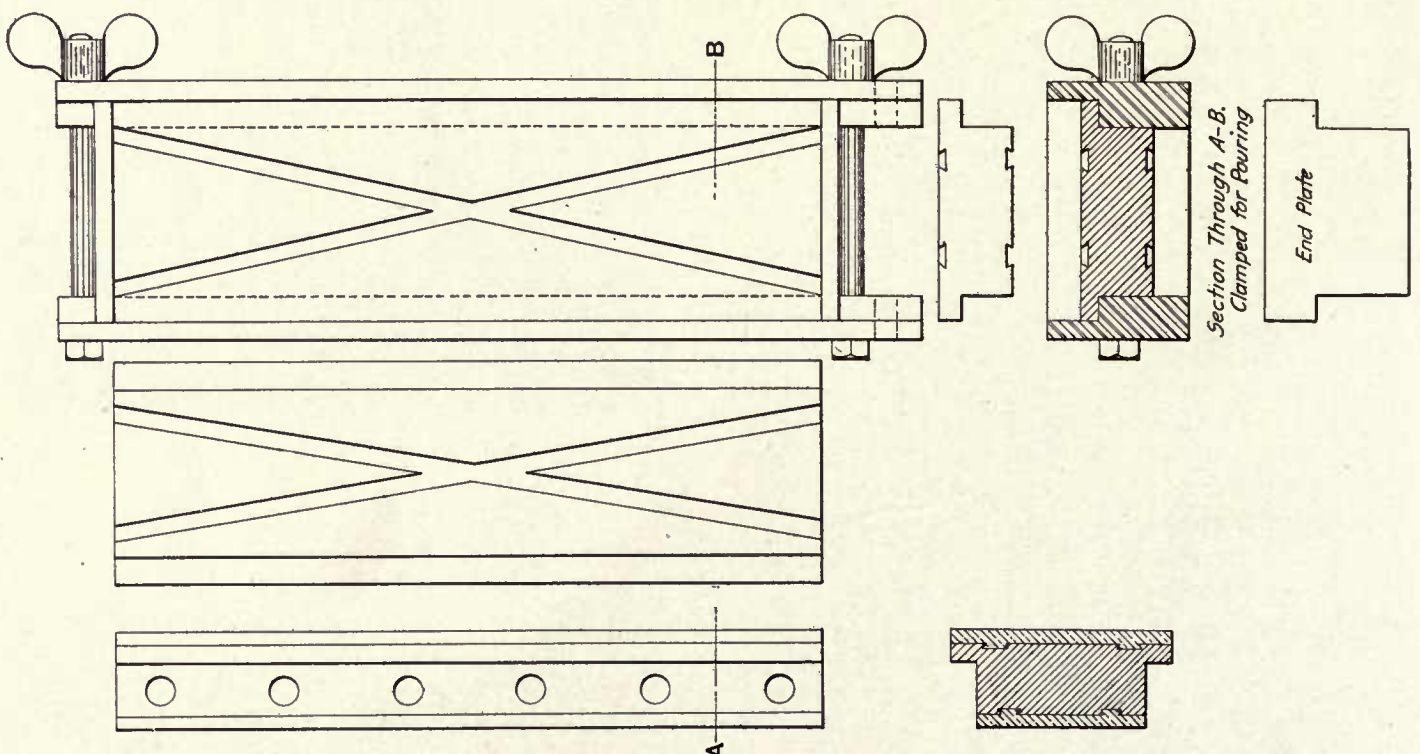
Clamp Used for Casting Brass Liner on Crosshead Gib.
